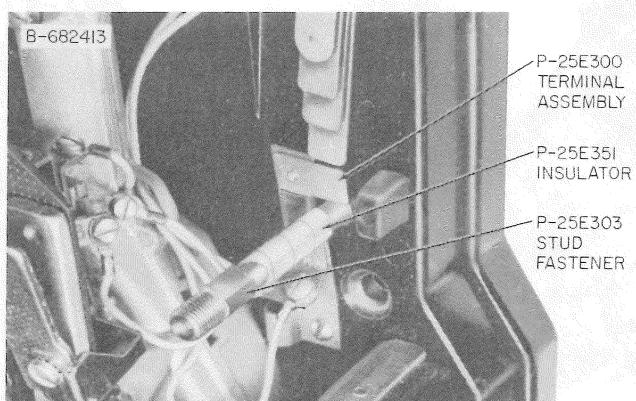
Terminal Assembly, Insulator, and Stud Fastener
